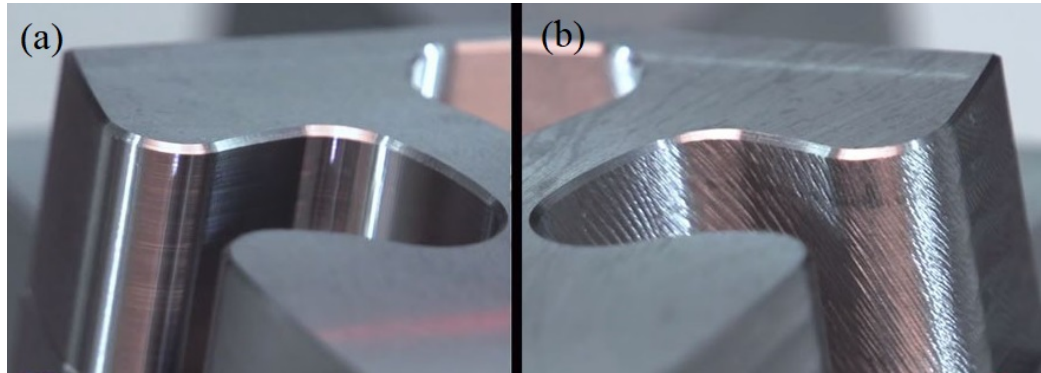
(a) Smooth surface finish after machining without chatter vibrations, (b) unacceptable surface finish due to chatter vibrations [3].
